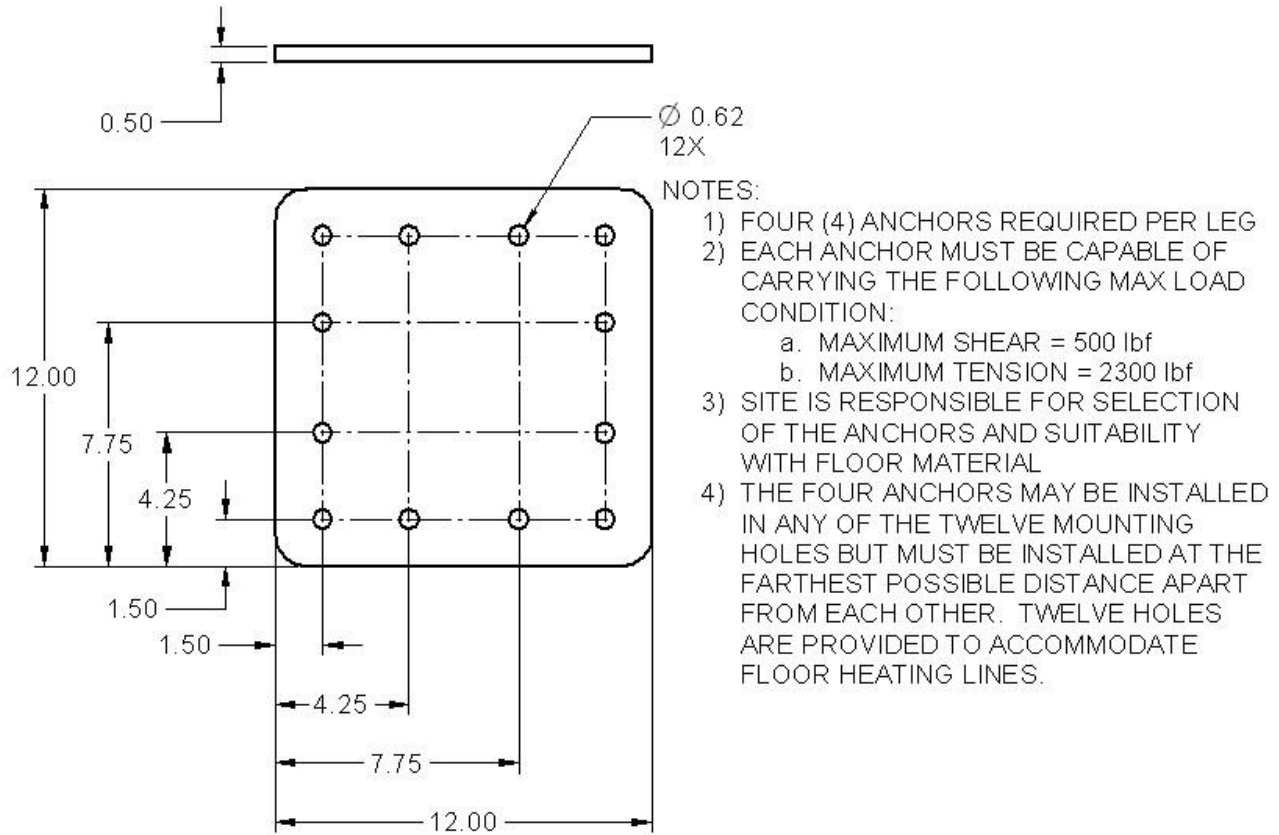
Supplied Frame Mounting Plate with Free-Standing Frame Option.
